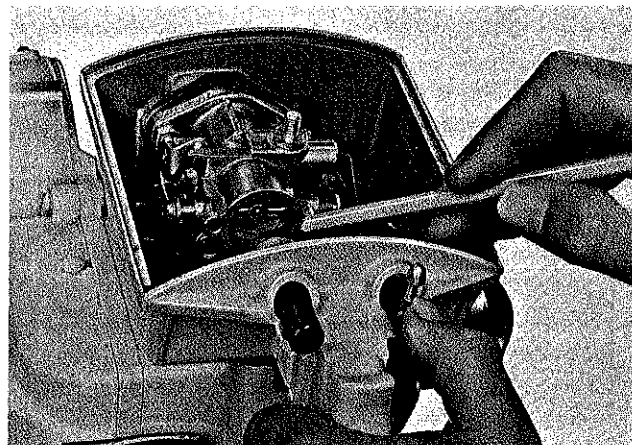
Checking the choke butterfly to see that it closes the carburetor throat when the choke button is pressed all the way in.
